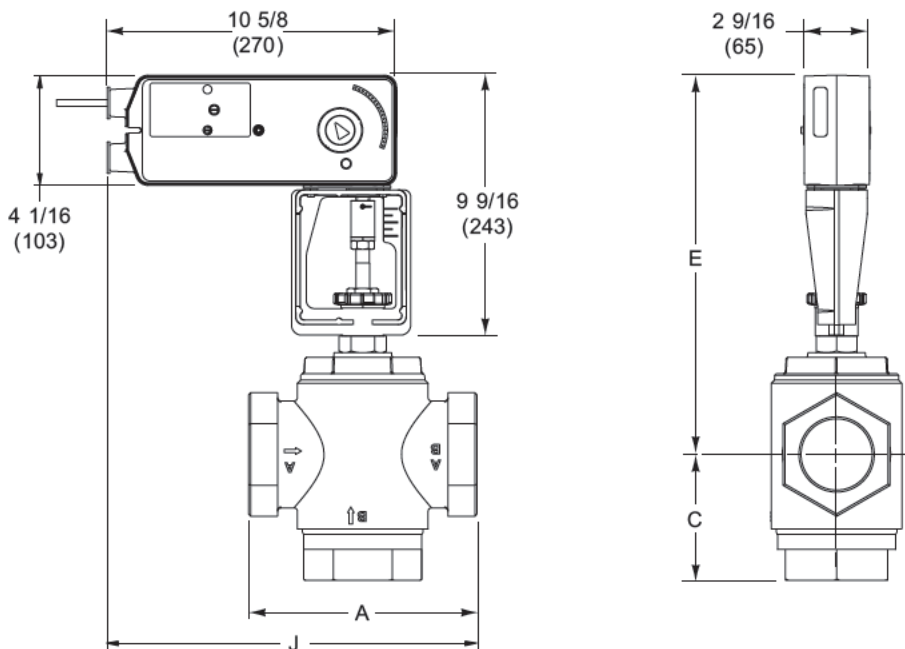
Mx61-720x with 2½" or 3" 3-Way Screwed Globe Valve.
